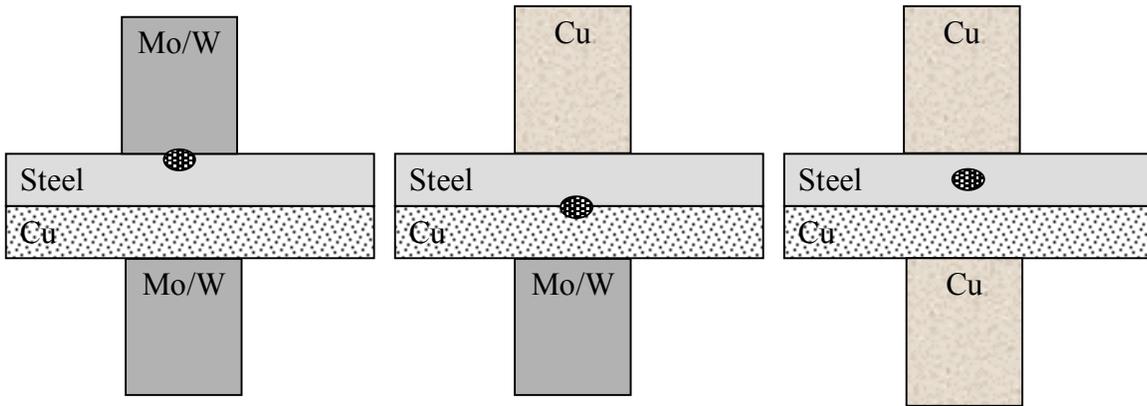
Schematic of weld stack showing choice of electrode material and the resultant shift in heat balance. A resistive electrode against a conductive part and vice-versa usually works well for heat balance.
